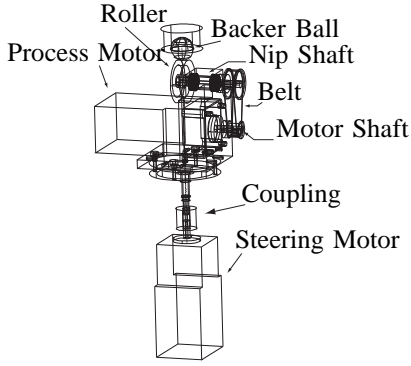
Process Direction Actuator and Steering Motor Mechanism
